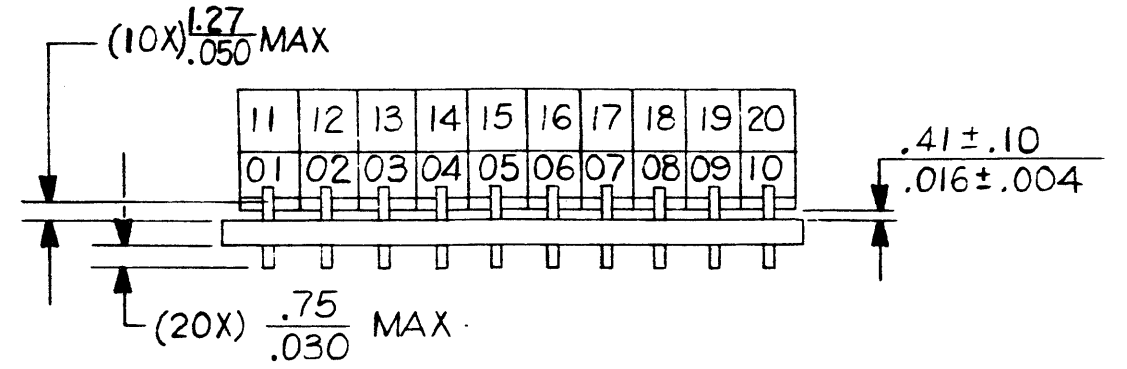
EXTERNAL CABLE ASSEMBLY
